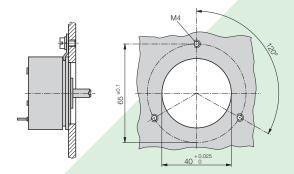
Drilling plan for fixing with 3 spring clamps.
